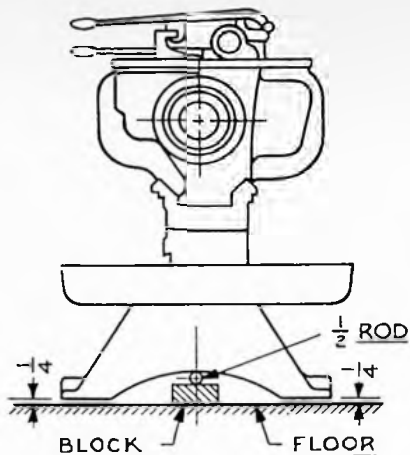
Drawing Illustrating Manner of Supporting End of Bed to Eliminate Twist while Rescraping Bed Bearings
